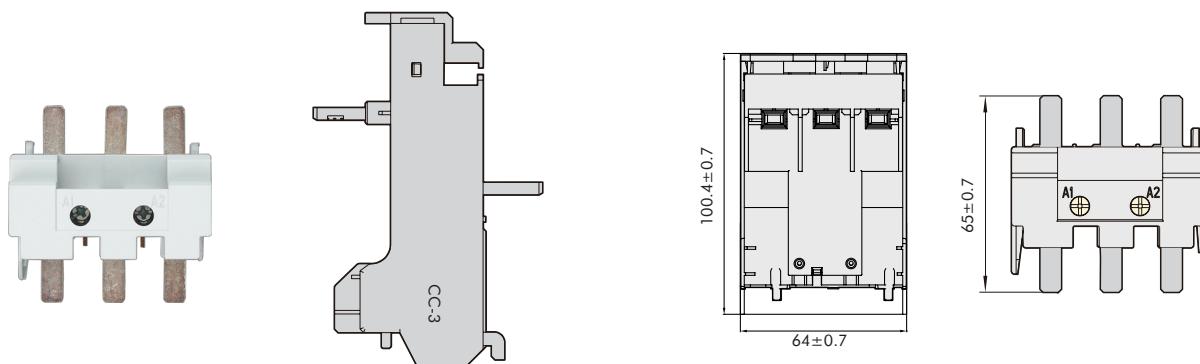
Outline and Instaling Dimensions of CC-2(NS2) after assembly with the starter and contactor
